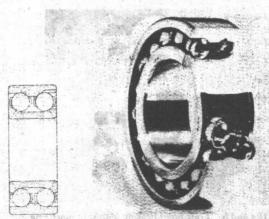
and b Double-row angular contact ball bearing with filling slots
